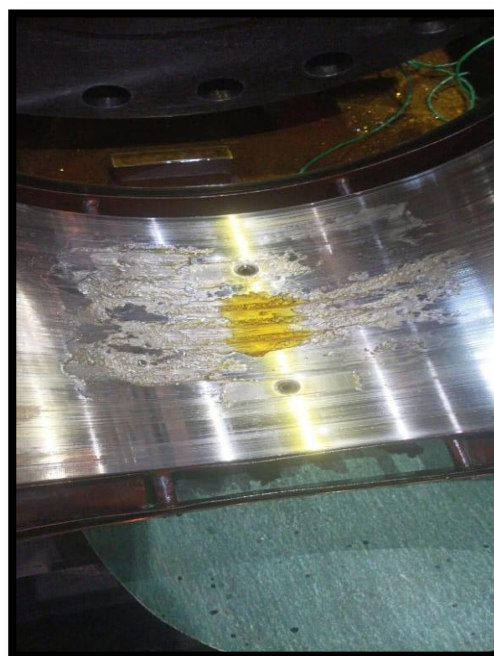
Babbitt wear and surface erosion on Bearing 4.
